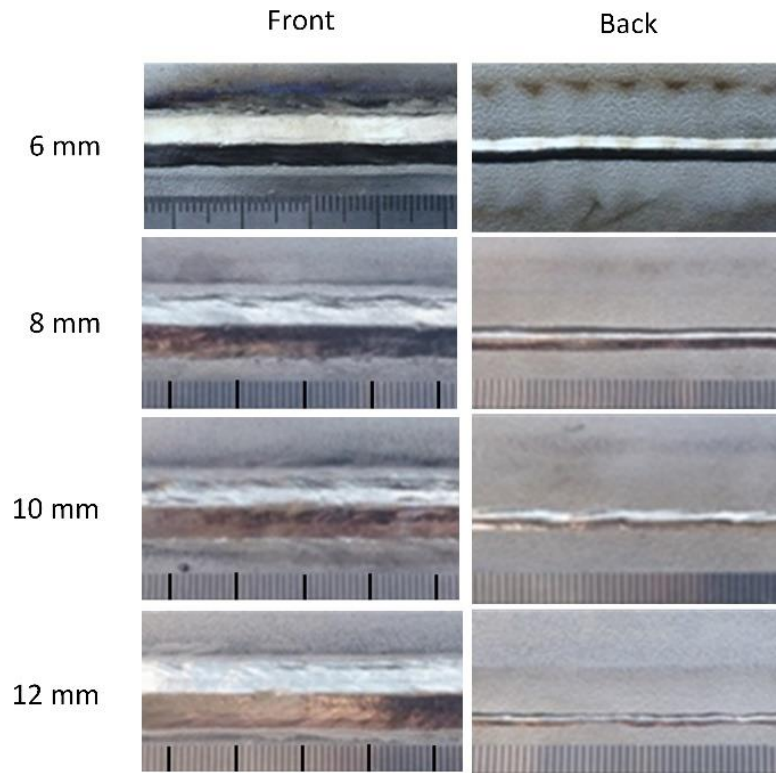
The macro-morphology of welds surface obtained with different defocusing distances.
